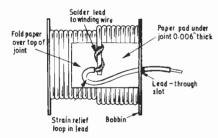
Method of terminating the winding wire with very thin flexible p.v.c. covered wire. Remove about in of enamel from winding with very fine emery paper. Do not allow paper pad, lead wire, or soldered joint to slide from top end of winding down the side of the winding where it would take up vital space and prevent the E's from fitting over the sides of the completed coil
